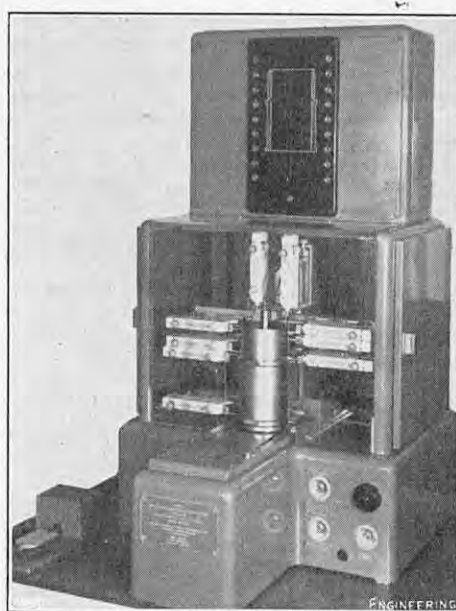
SEMI-AUTOMATIC INSPECTION MACHINE.
